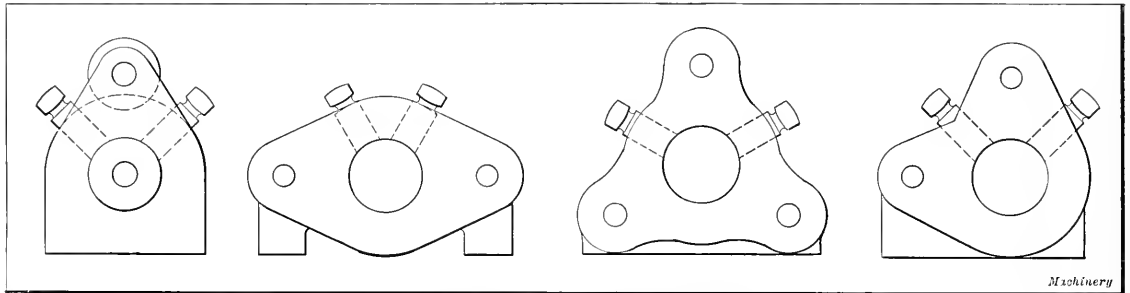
Centers for turning Single, Double, Triple and Right-angle Crankshafts
